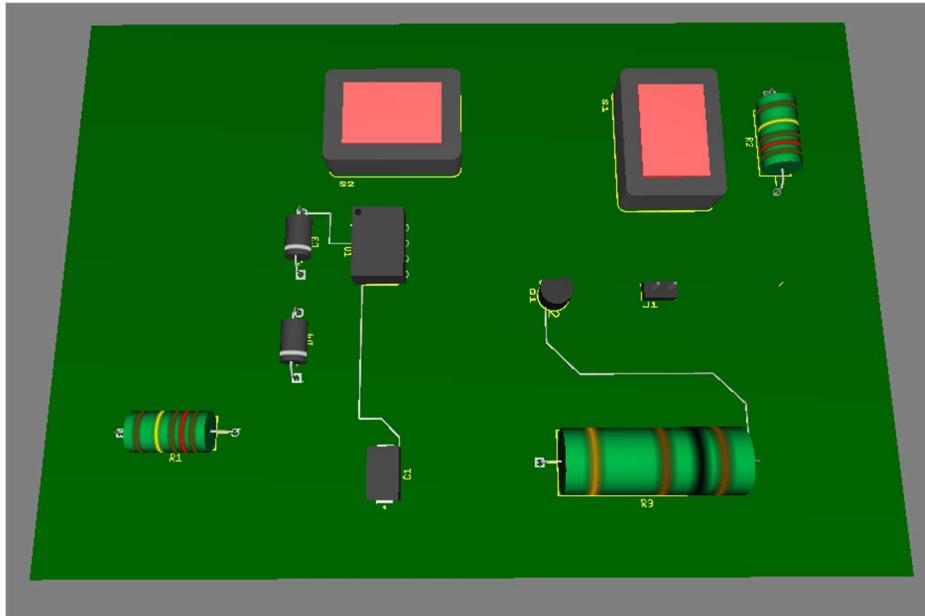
Ultiboard PCB 3D View (5000 mil x 3500 mil) For Vcc and GND I implemented HEADER1X2 connector.
